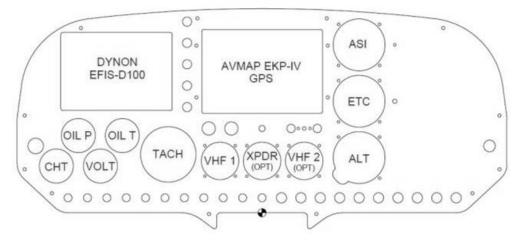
Instrument Panel Layout Type 2 (all J-Series)
